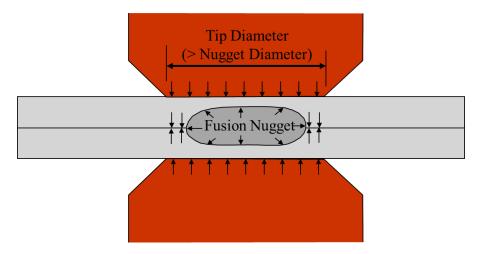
Schematic shows fusion nugget exerting outward pressure on surrounding solid material; while welding force is exerting enough pressure to contain the molten metal and prevent it from escaping.
